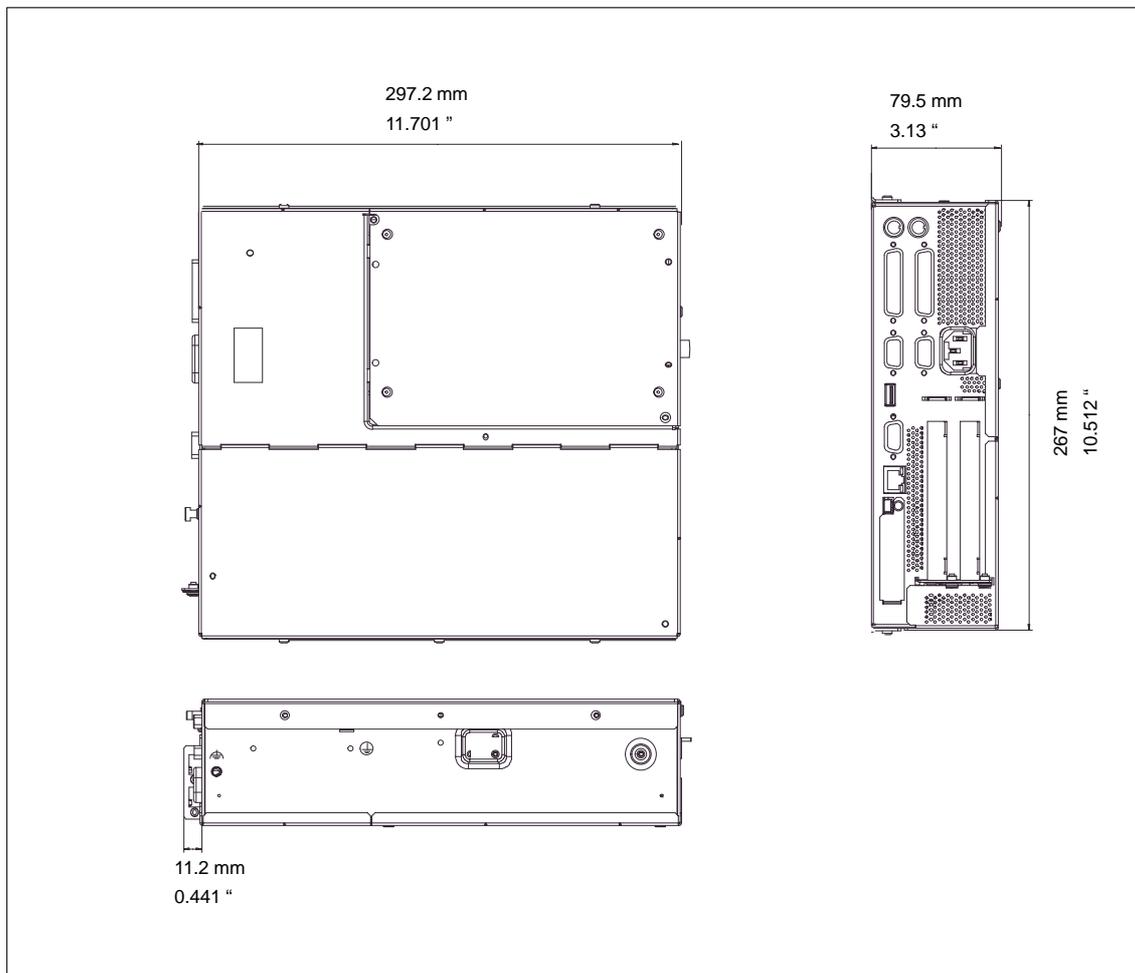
Dimension Drawings for Installing in Panel with Installation Bracket (Device without CD-ROM Drive)
